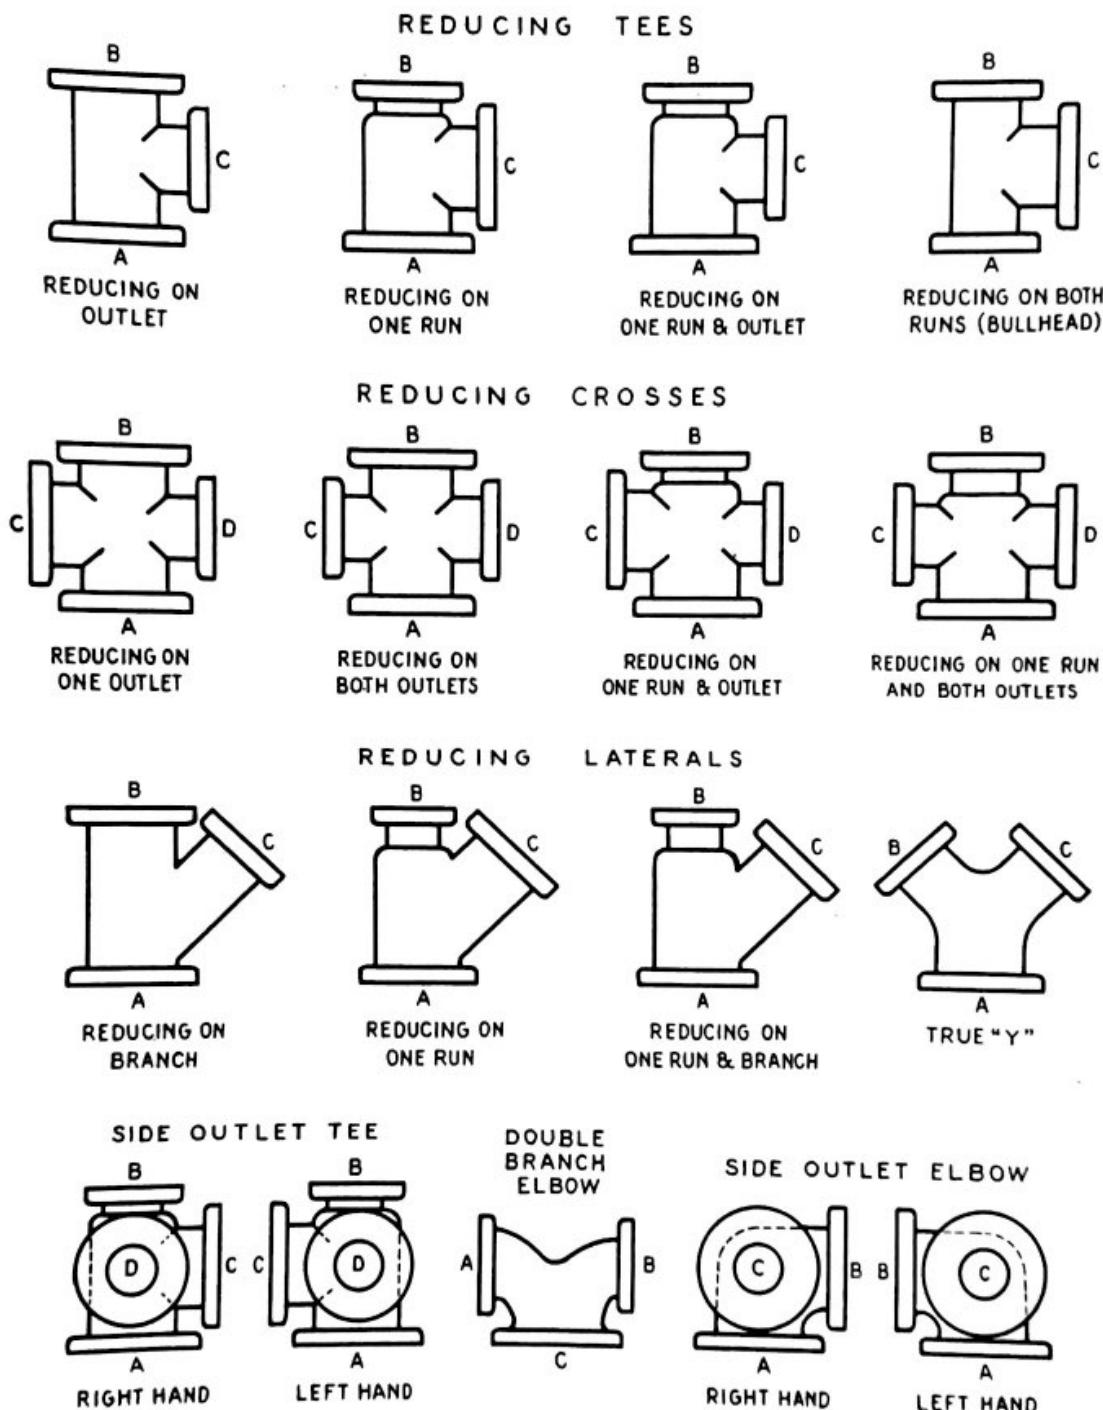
METHOD OF DESIGNATING OUTLETS OF REDUCING FITTINGS
